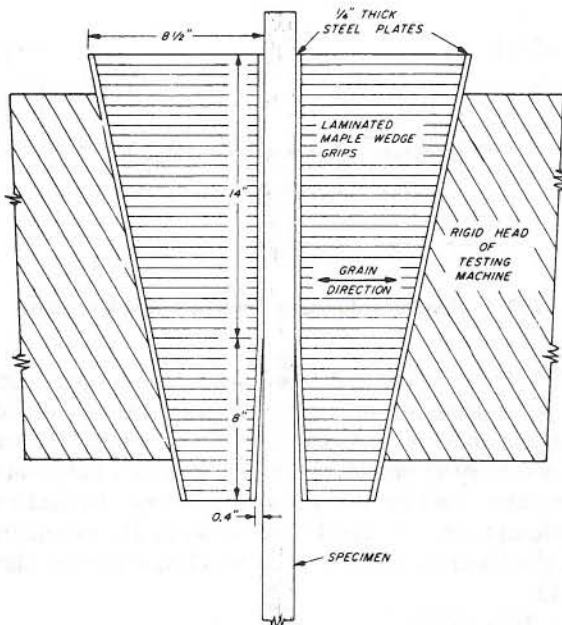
Side View of Wedge Grips Used to Anchor Full-Size Structurally Graded Tension Specimens
